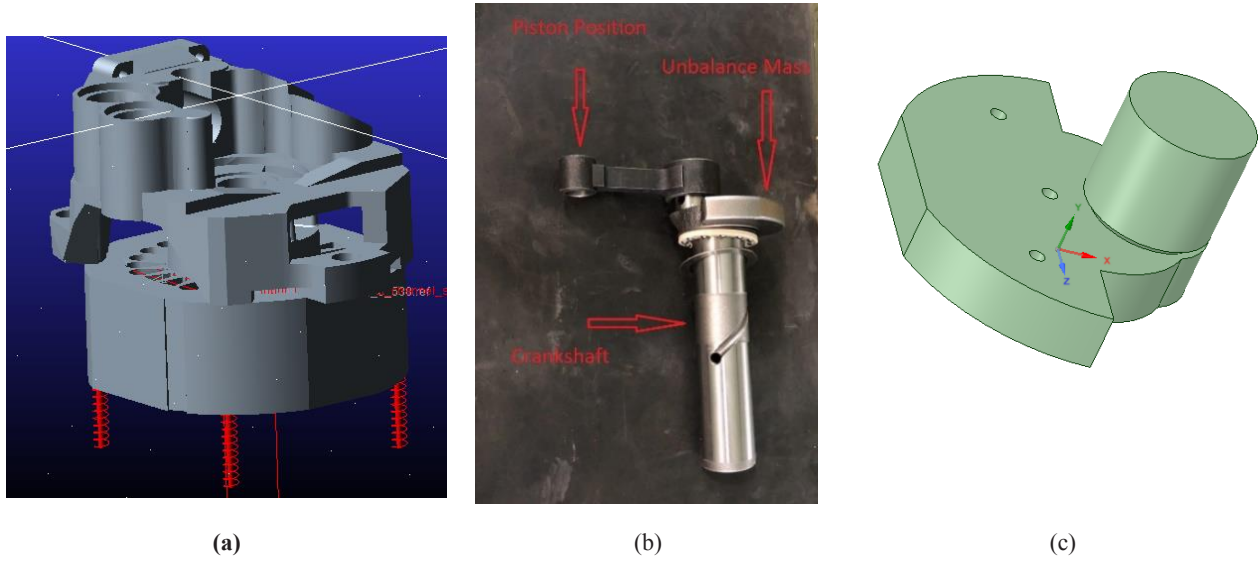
(a) 3D model of Compressor in ADAMS (b) Crankshaft (c) Unbalanced top mass of the crankshaft
